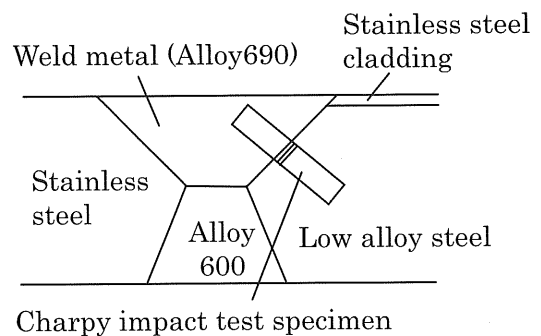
Charpy impact test location from temper bead welded test piece
